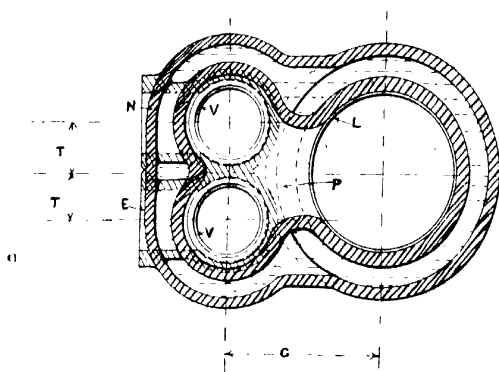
Sectional plan of cylinder through combustion chamber, showing the admission and exhaust valves arranged side by side
